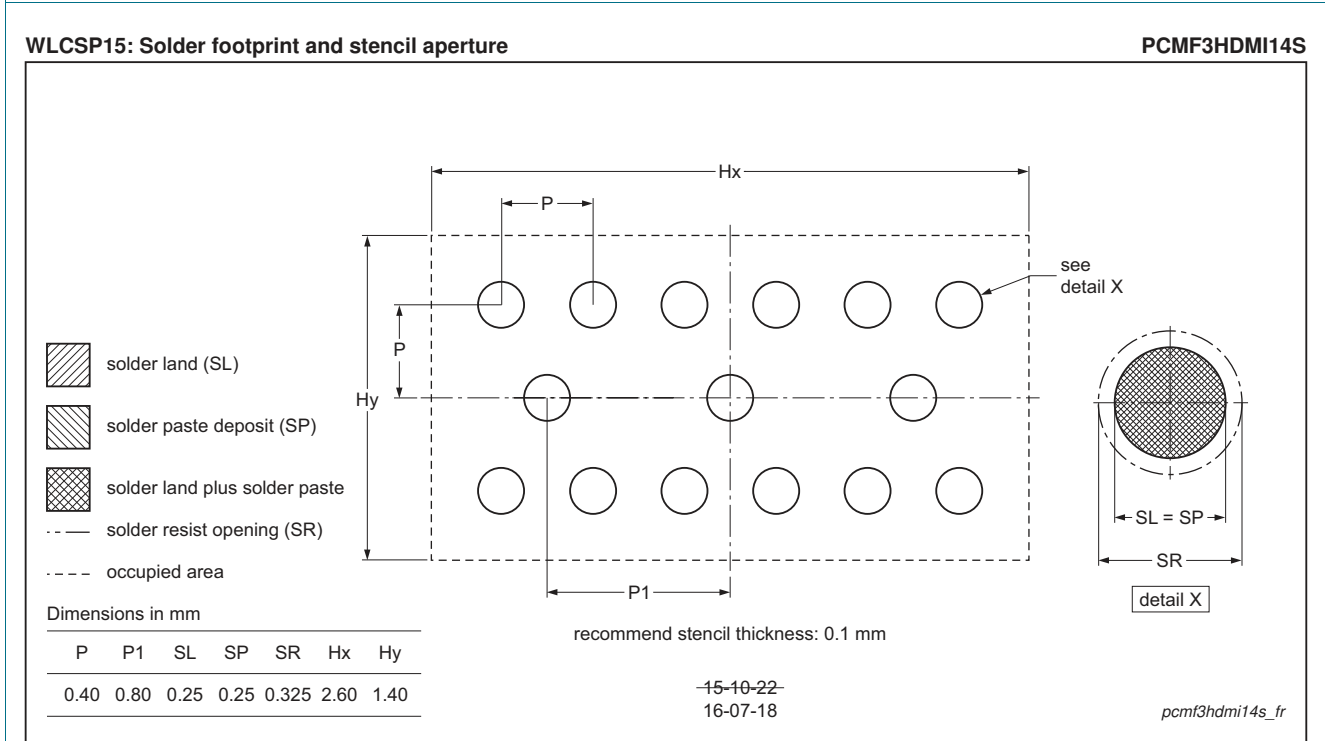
Soldering footprint WLCSP15 (PCMF3HDMI14S)
